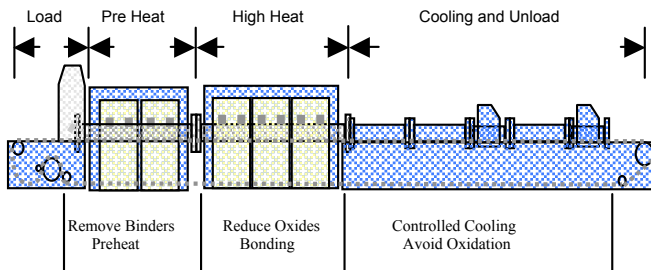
Schematic of a Straight Through Continuous Belt Furnace
